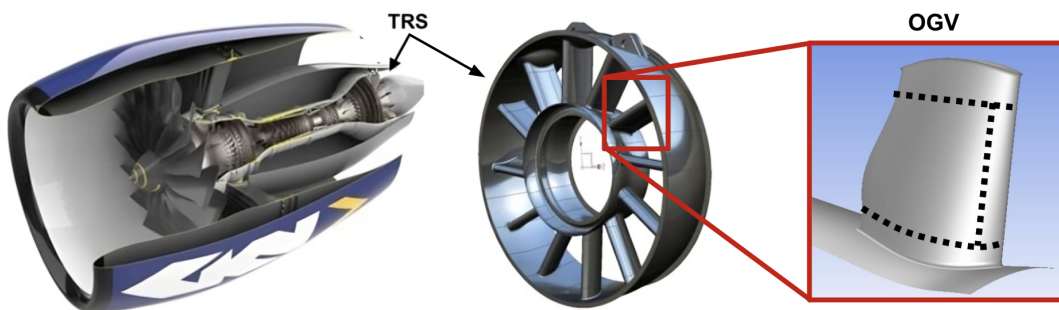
TRS Location in aero-engine (left), TRS housing the OGVs (middle) and one single OGV showing common weld locations (right).
